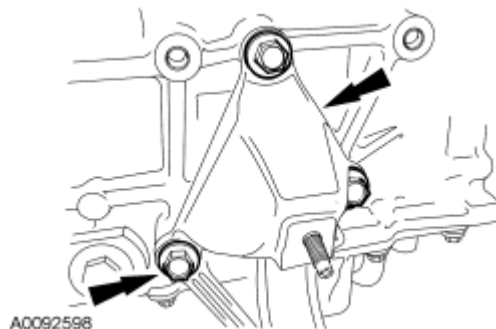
Locating Intermediate Shaft Bearing Bracket And Bolts
